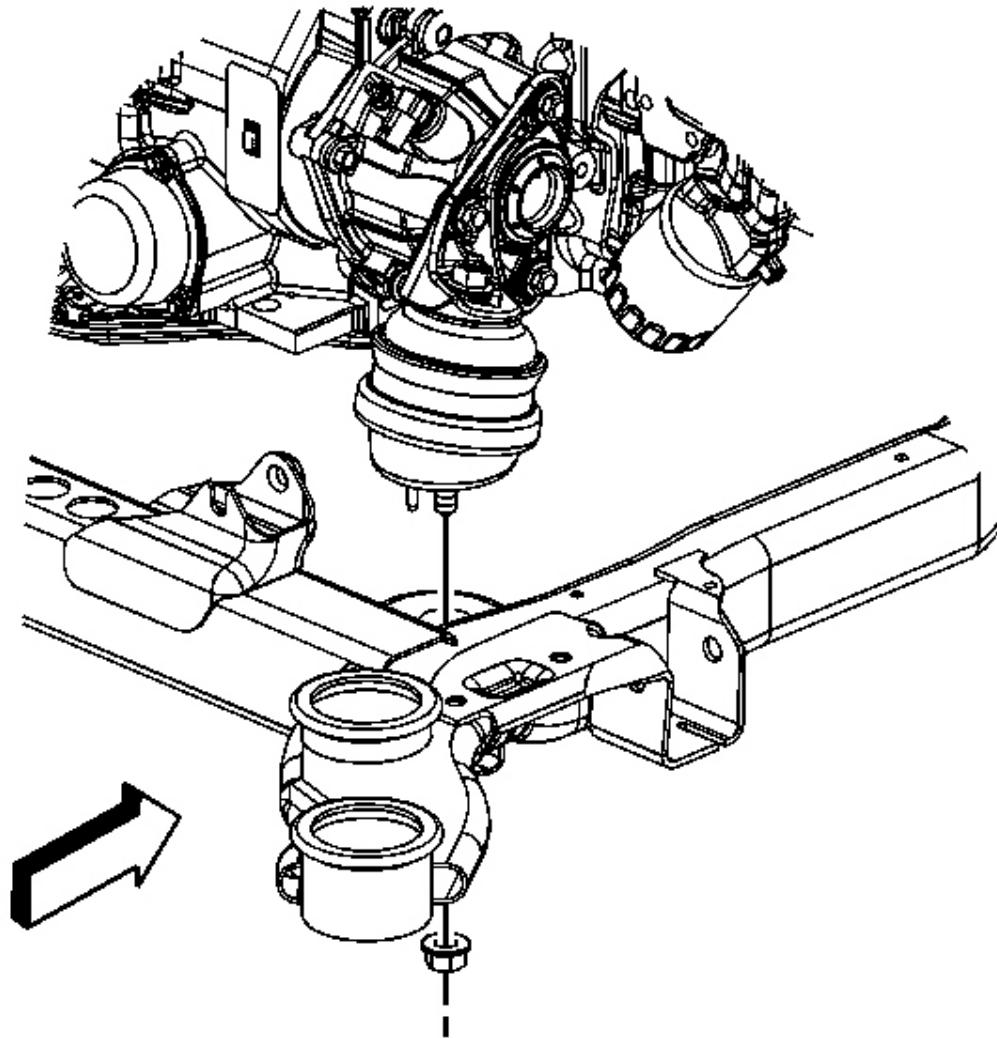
View Of Engine Front Mount To Frame Nut
